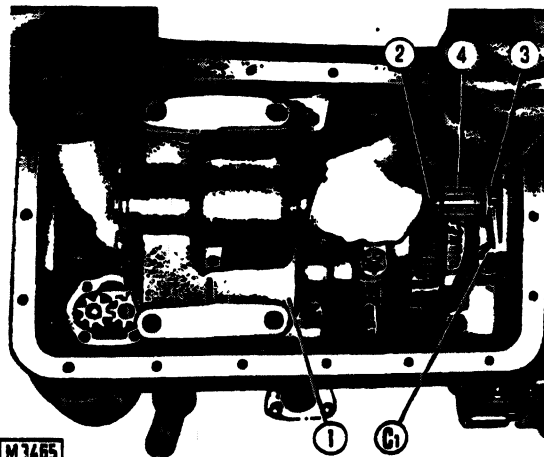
Removing damper box (1) with sleeve coupling (2) from oil pan installed on engine.
